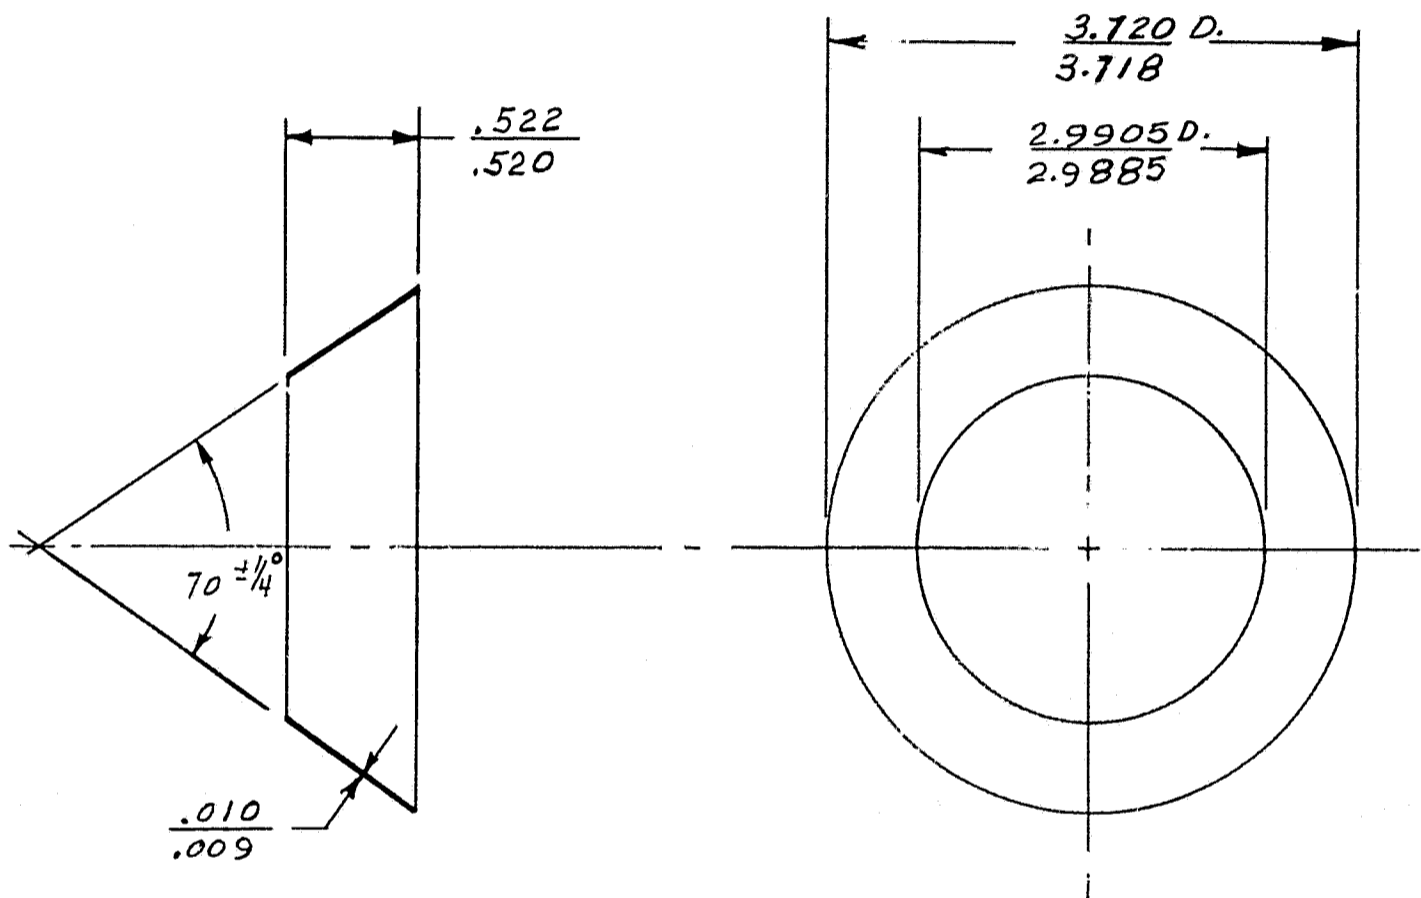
Three-Inch Cobalt Molybdenum Lip Seal
